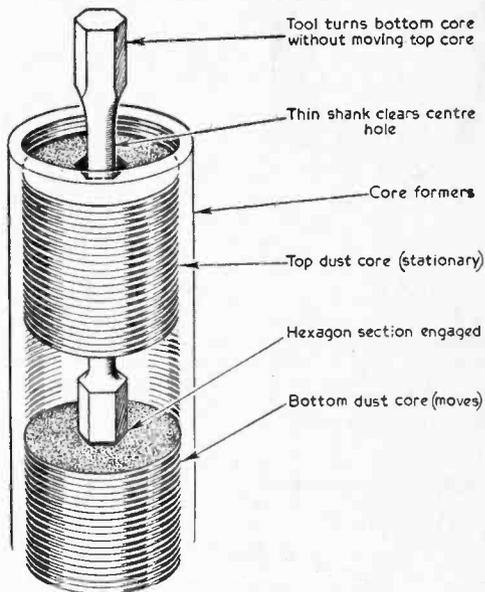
This tool enables the bottom core of an I.F. transformer to be turned, without moving the top core.
